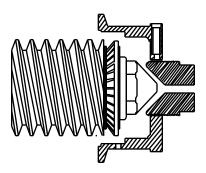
Internal configuration of BARREL END SECTION and NOZZLE PIECE assembly
